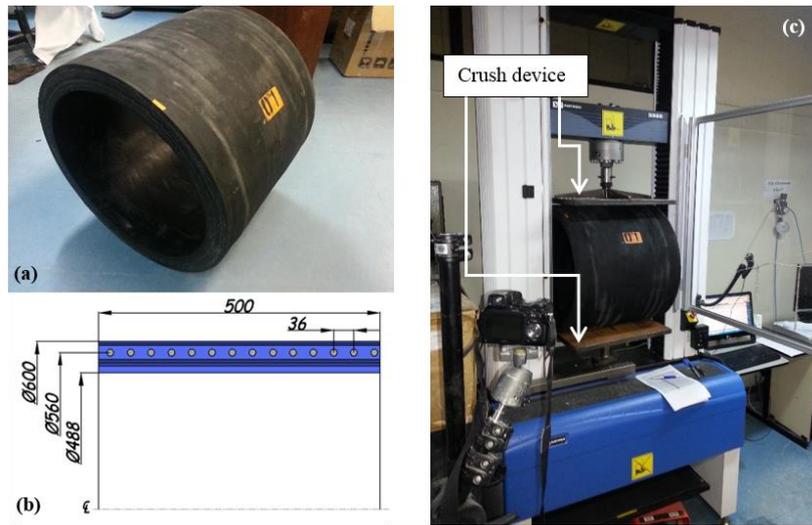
Photographs of one of the hose sections (a), dimensions [mm] (b) and during the crush test in the Instron machine (c).
